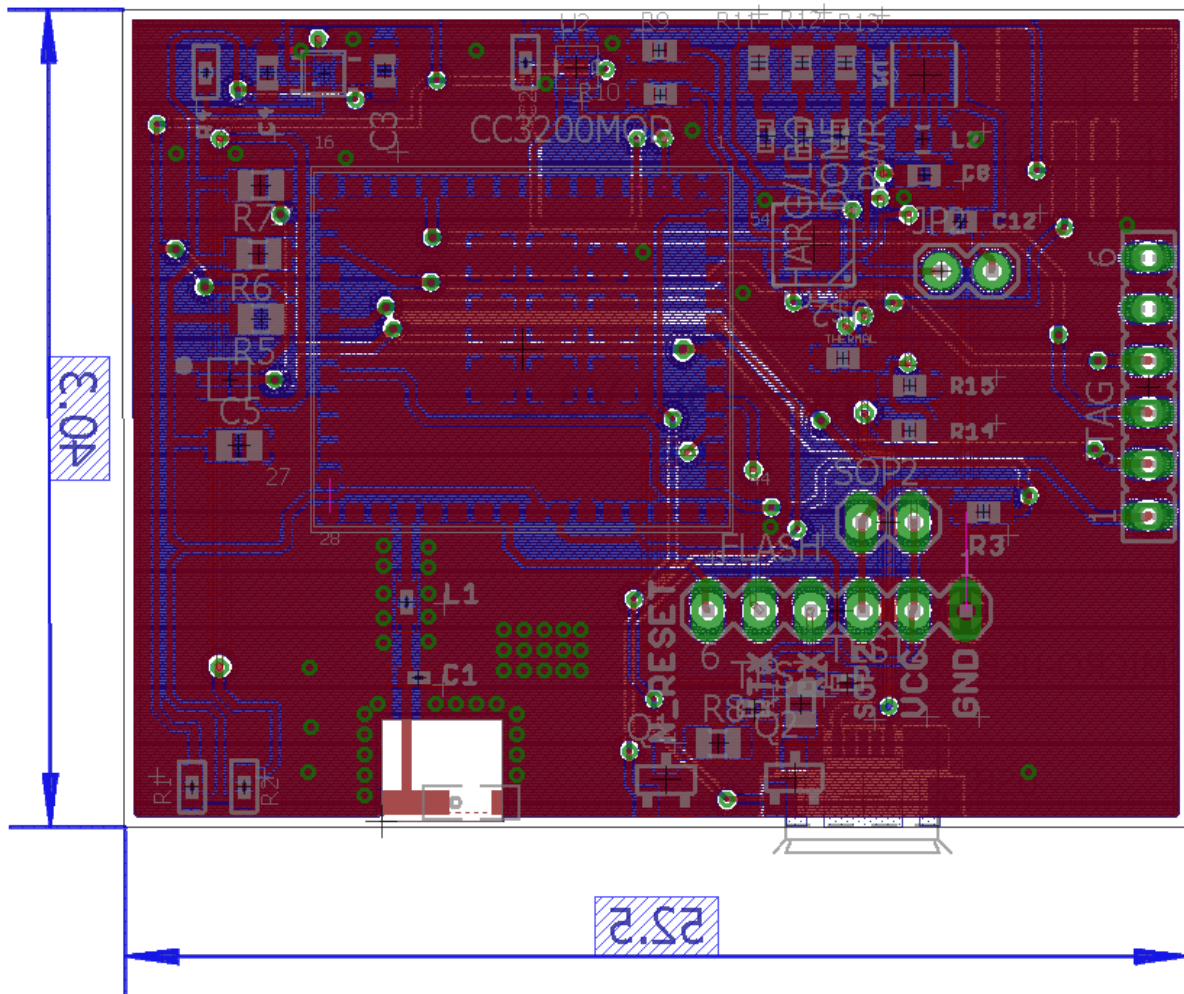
RATSNEST VIEW OF PCB BOARD
